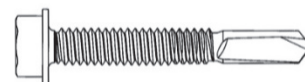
1/4-20 INDENTED HEX WASHER HEAD ROUND BODY TAPTITE (TYPE 8 SCREW)
